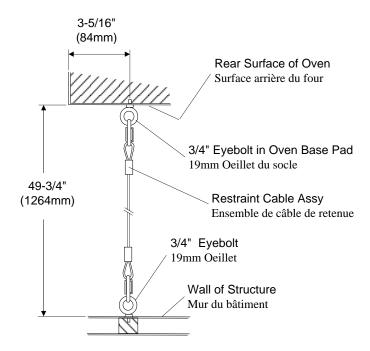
Restraint Cable Assembly Installation Figure 2-7. Installer l'ensemble de câble de retenue
